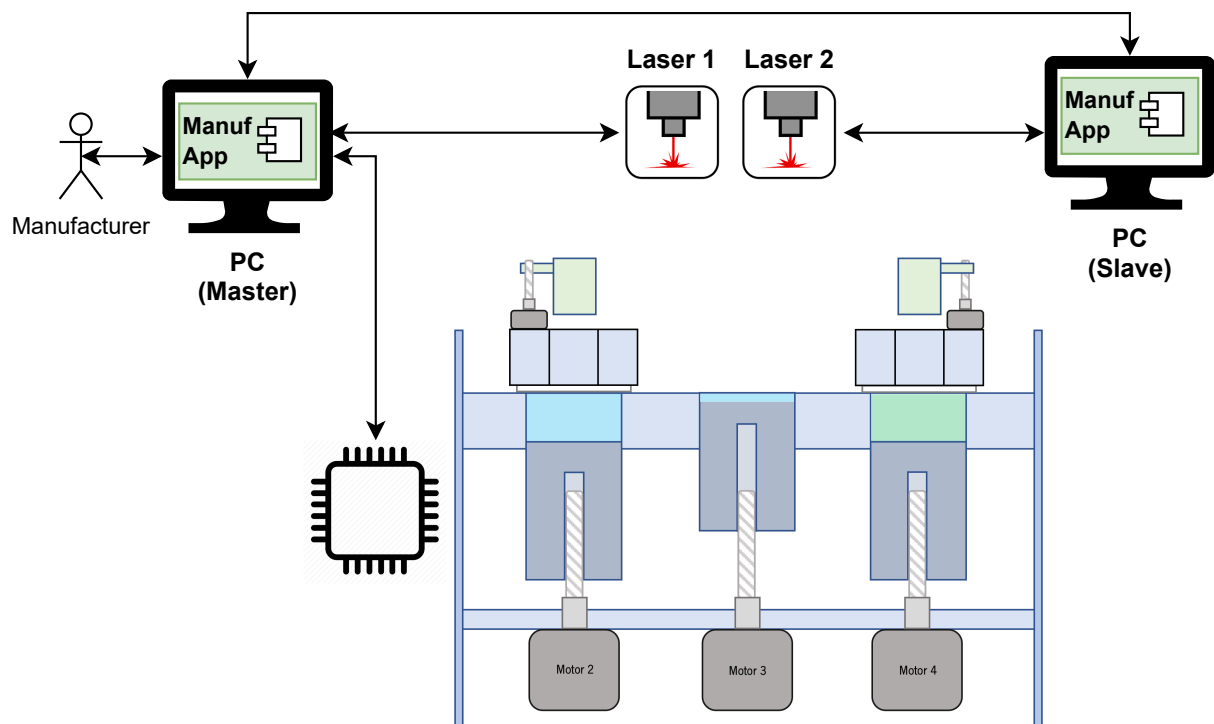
Working principle of the 3DMMLPBF machine: initial state
